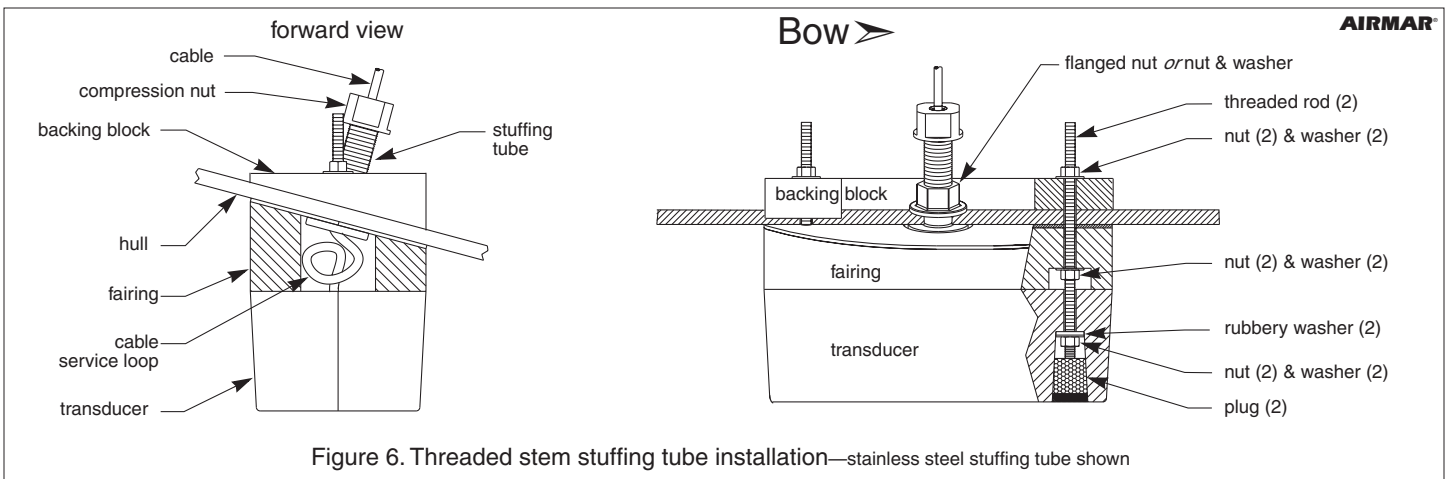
Threaded stem stuffing tube installation—stainless steel stuffing tube shown
